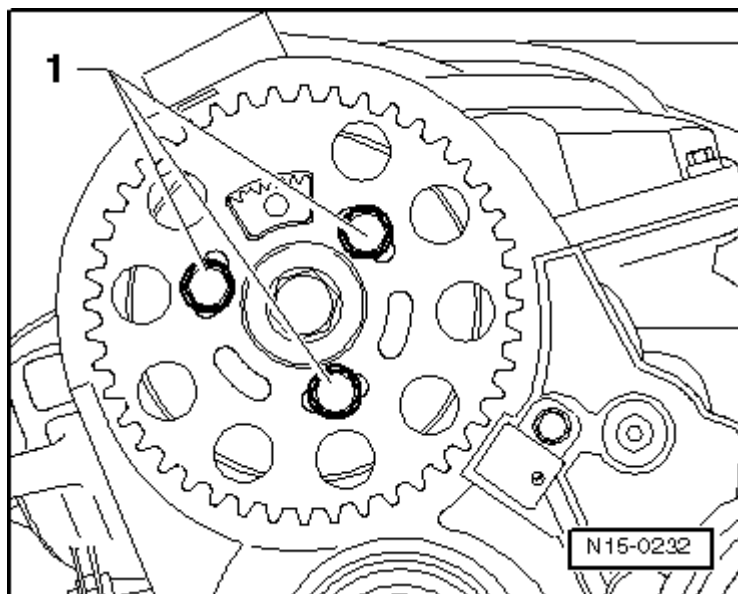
Identifying Camshaft Pulley Securing Bolts
